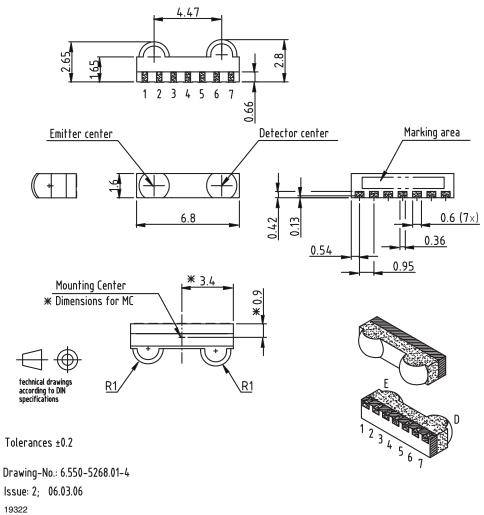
TFBS4650 Mechanical Dimensions, Tolerance ± 0.2 mm, if not otherwise mentioned
